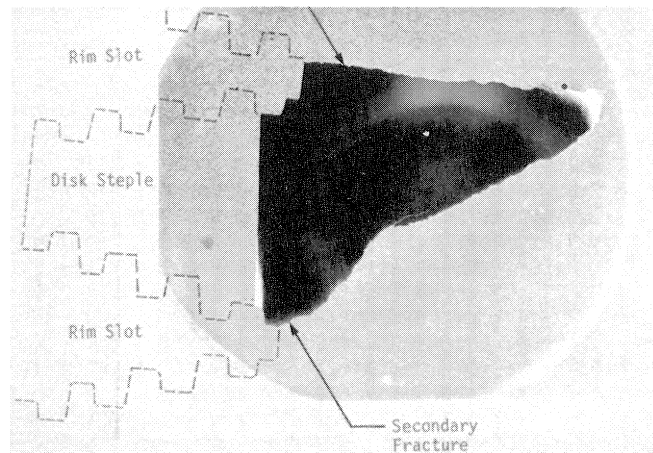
Metallographic Specimen Through Primary Fracture Origin and Parallel to Inlet Face of Disk. Primary Fracture Surface Is Along Top With Portion of Rim Slot in Upper Left-hand Corner. Left Edge of Specimen Is the Result of Cut to Remove Fir Tree. The Lower Edge of the Specimen Is the Result of a Secondary Fracture from Adjacent Rim Slot. (Approximately 1.5 \times).
